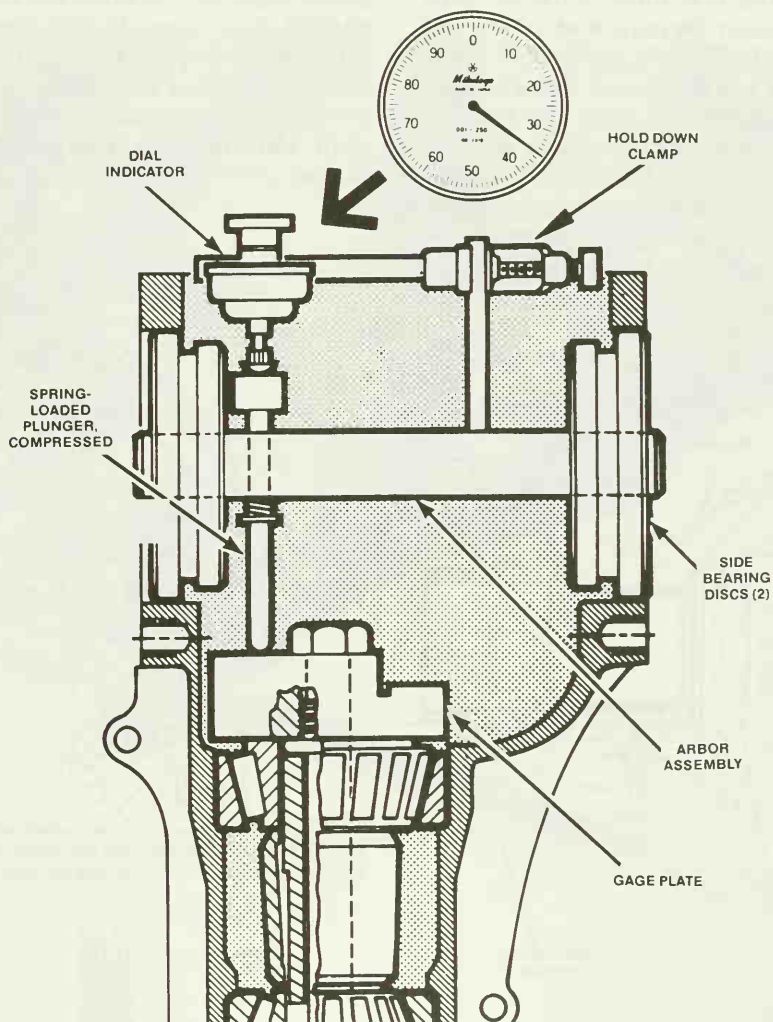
Pinion depth is measured with a dial indicator and arbor assembly. (Nissan Motor Corporation in USA)
